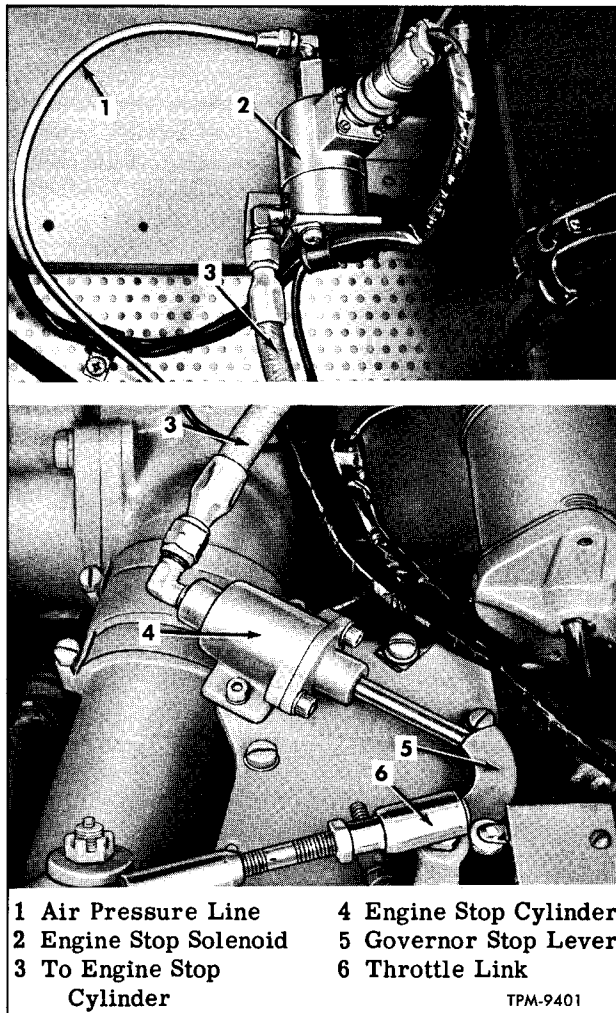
Engine Stop Solenoid and Air Cylinder Installation
